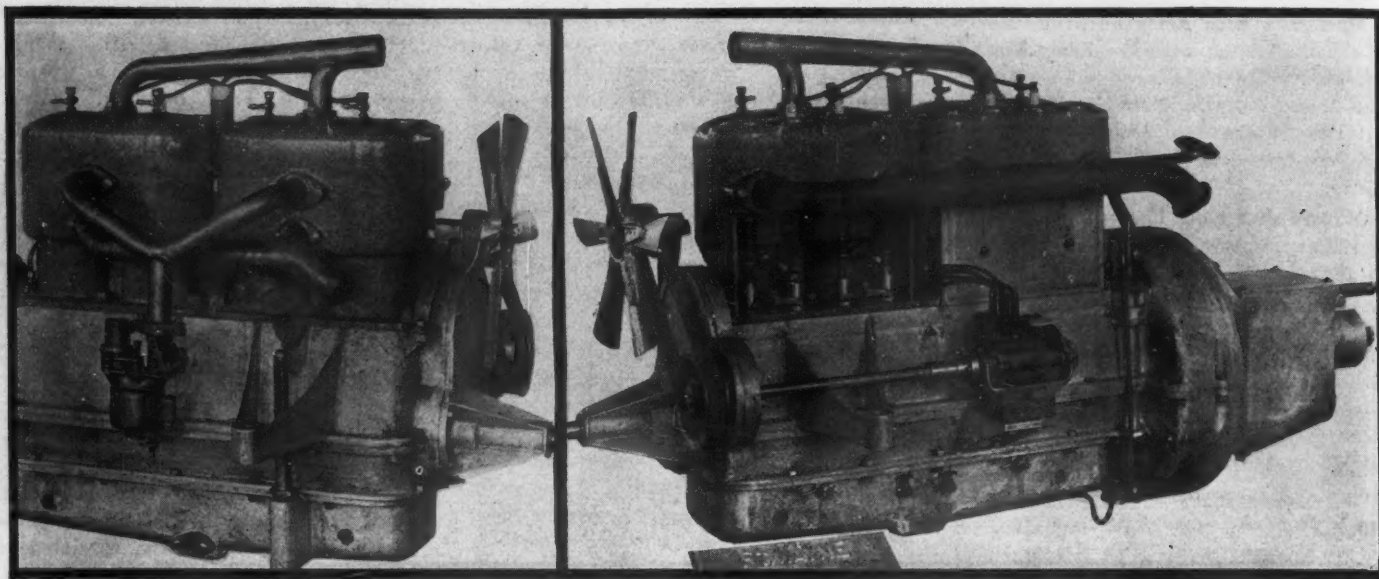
FORT WAYNE UNIT MOTOR AND SELECTIVE GEARSET
